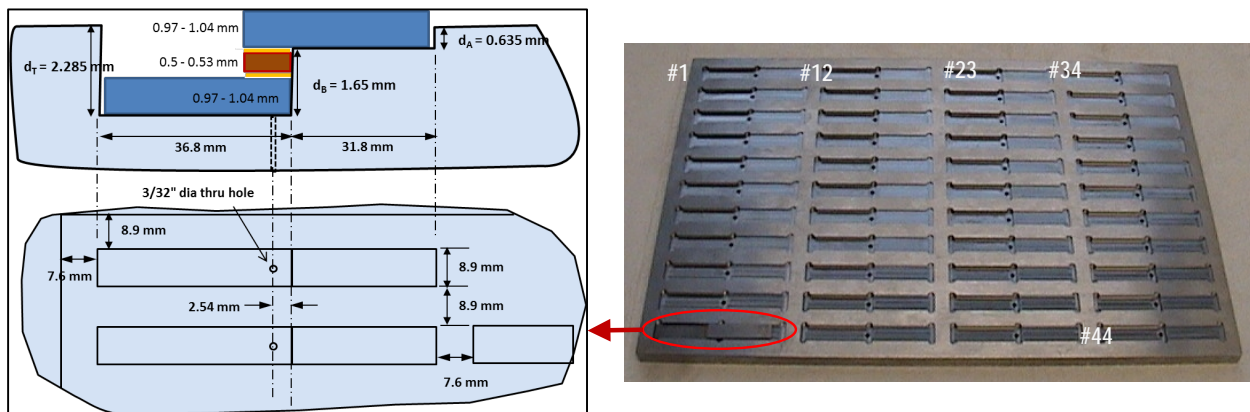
Schematic diagram of subscale lap shear specimen with dimensions and picture of stainless steel molding fixture.
